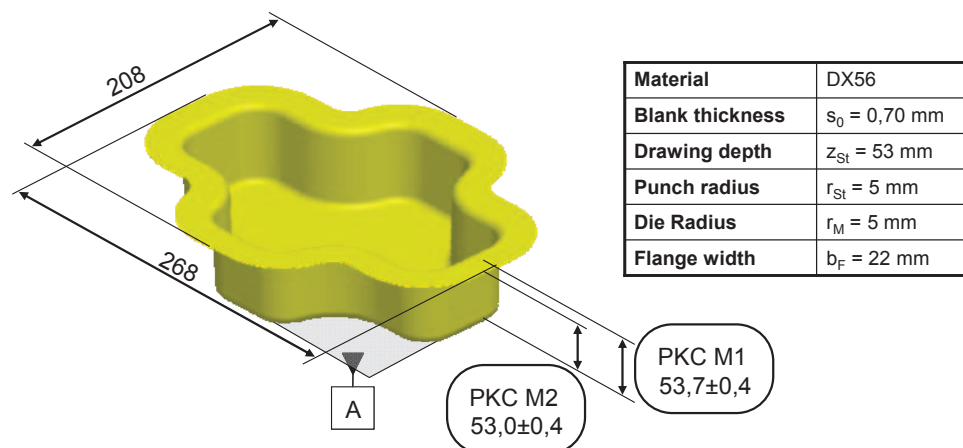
3: The cross-shaped part [Stockinger 10a]
